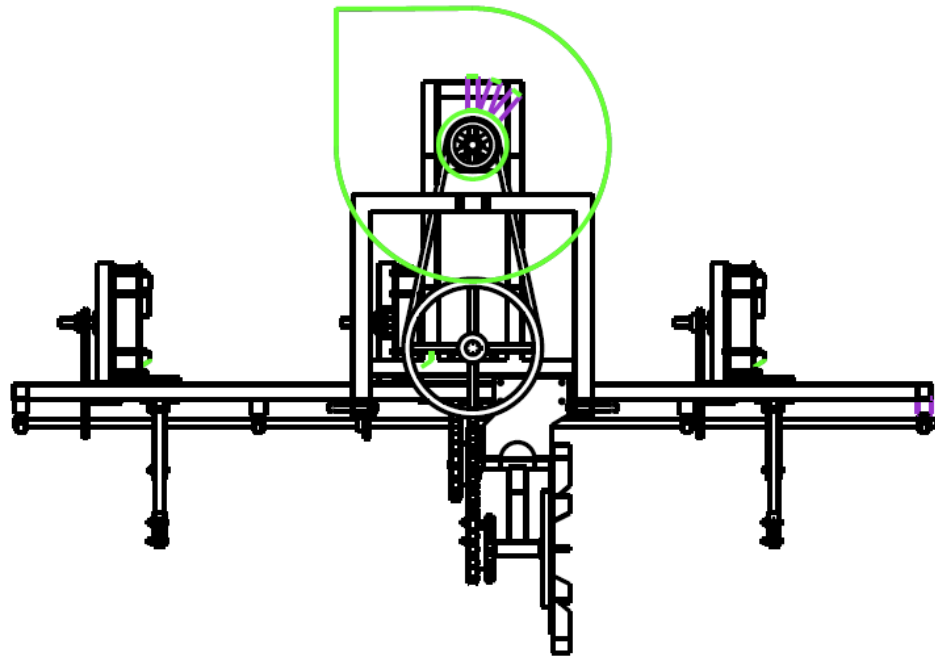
Complete assembly drawing of prototype pneumatic planter front view
